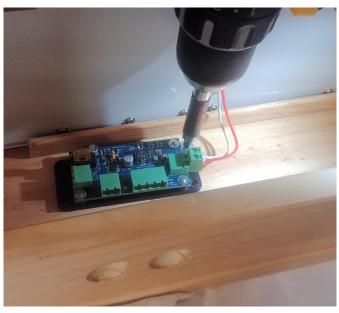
Once you've positioned the control board, screw it down using four truss-head screws. Be sure to leave plenty of room for the back side connectors!
